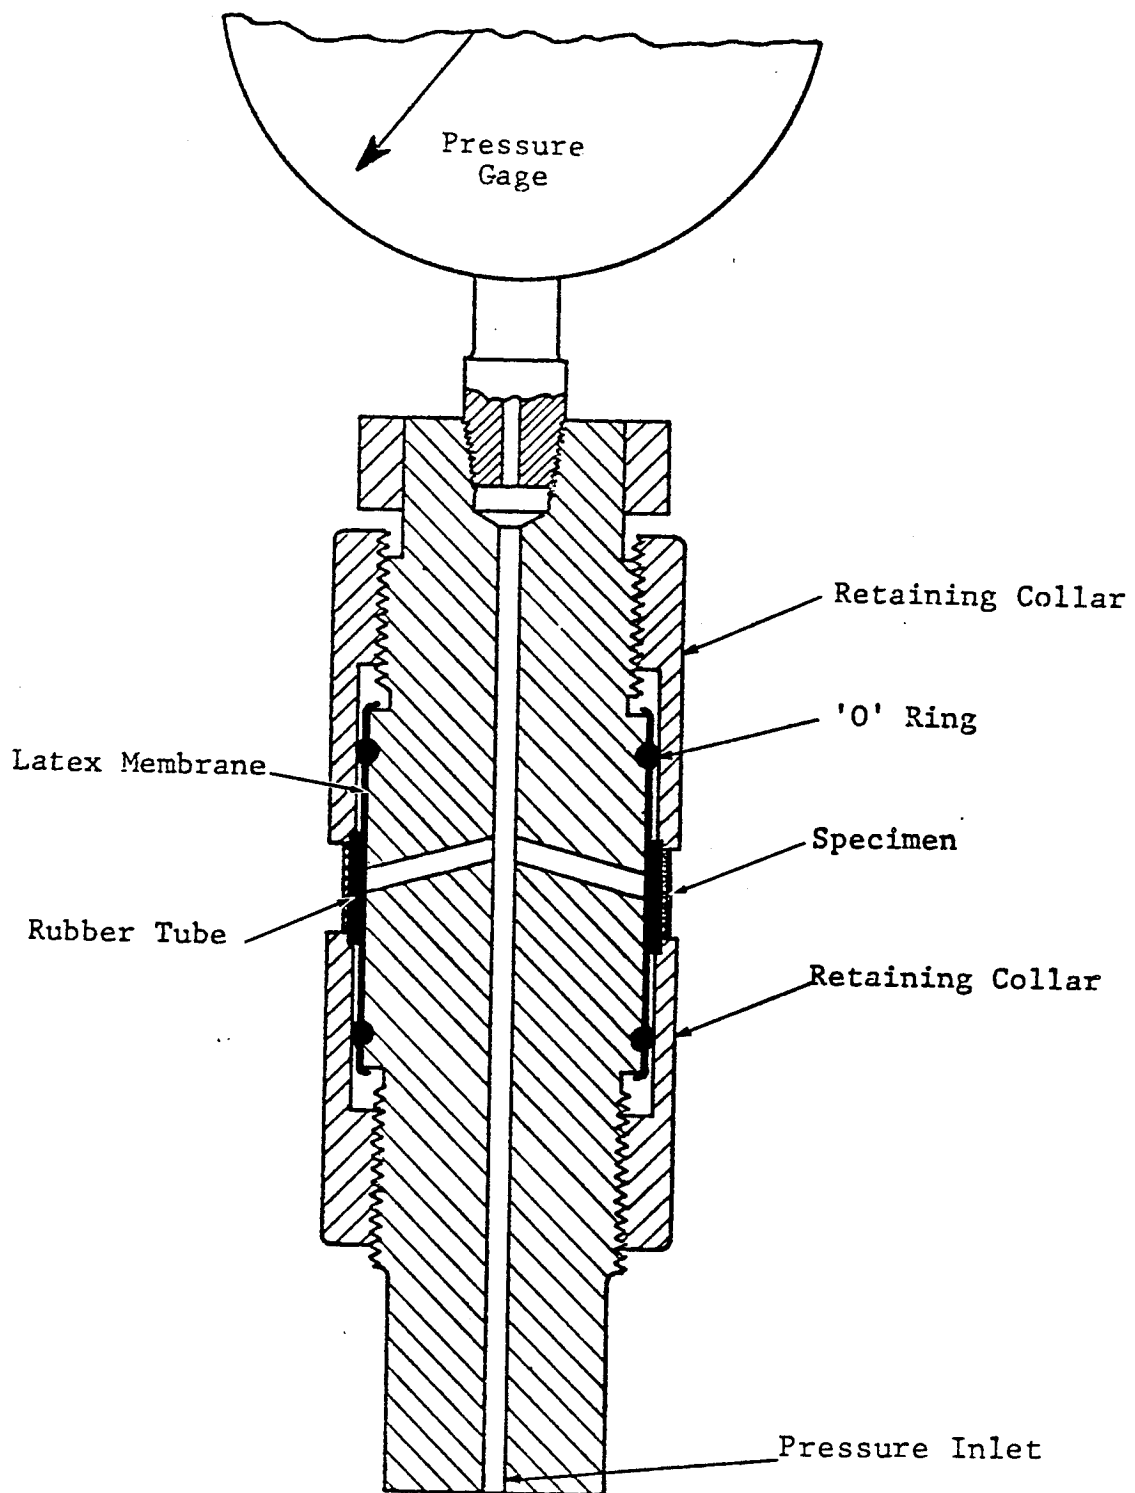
Fixture for quasi-static loading of composite ring specimens.
